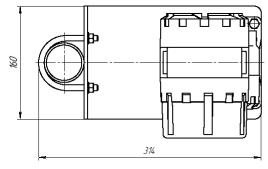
Mounting bracket for standard electronic unit of remote type flow meter on the support bar. Table A.12 - Mounting kit for standard electronic unit, remote type flow meter.
